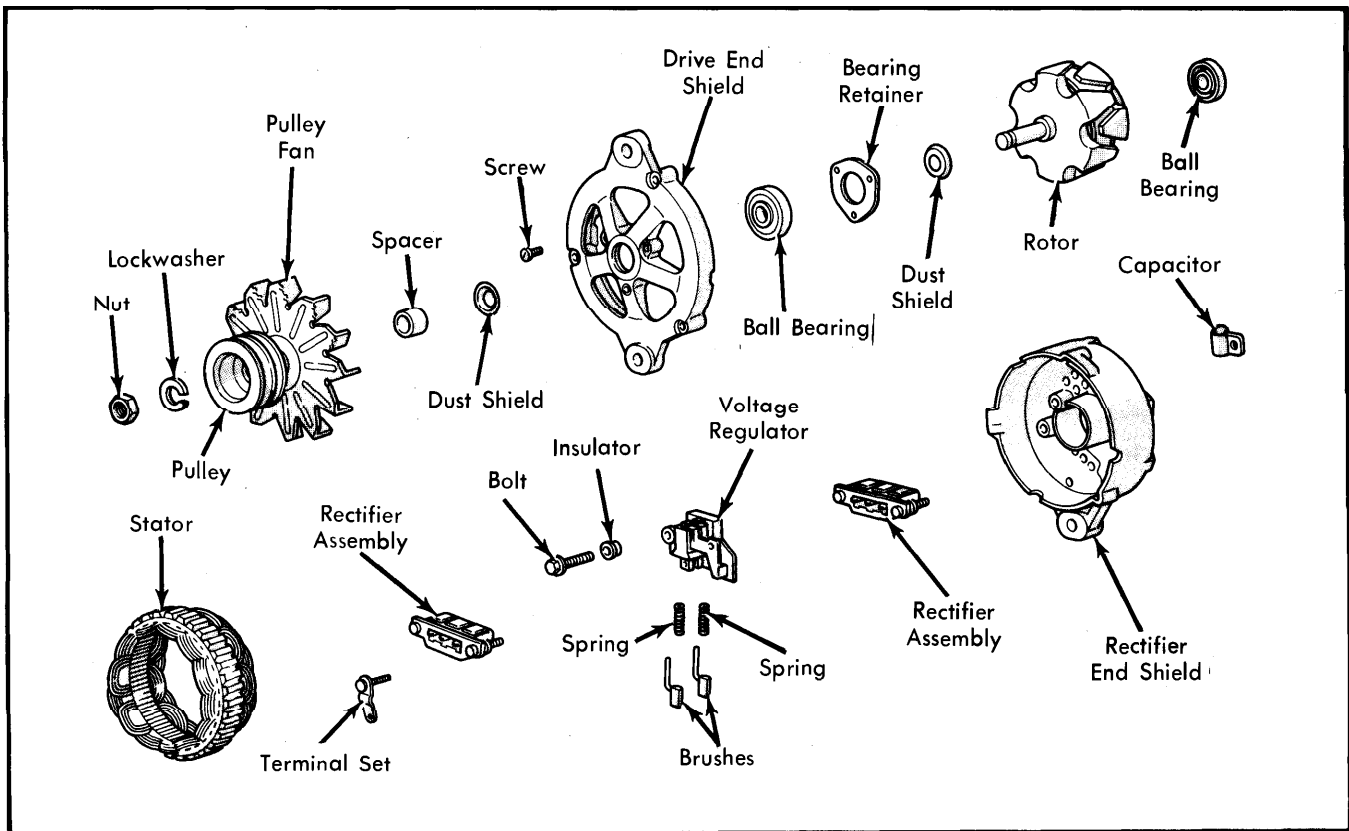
Exploded View of Chrysler Corp. (Mitsubishi) Alternator
